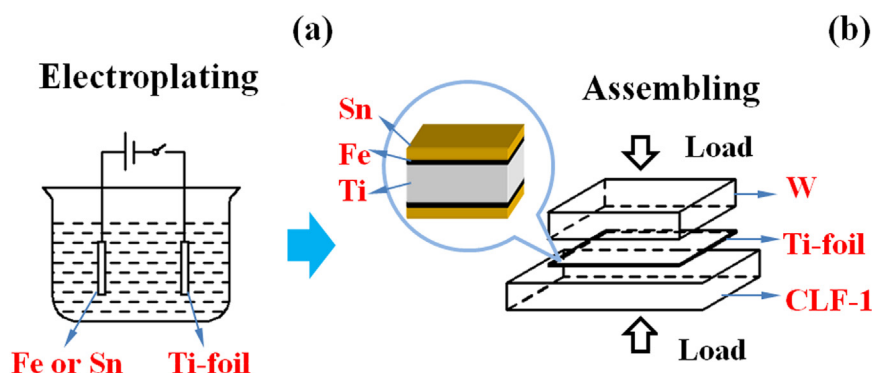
Schematic illustration of (a) the fabrication of Ti-Fe-Sn thin film assembly by electroplating and (b) the sample assembly prior to brazing.
